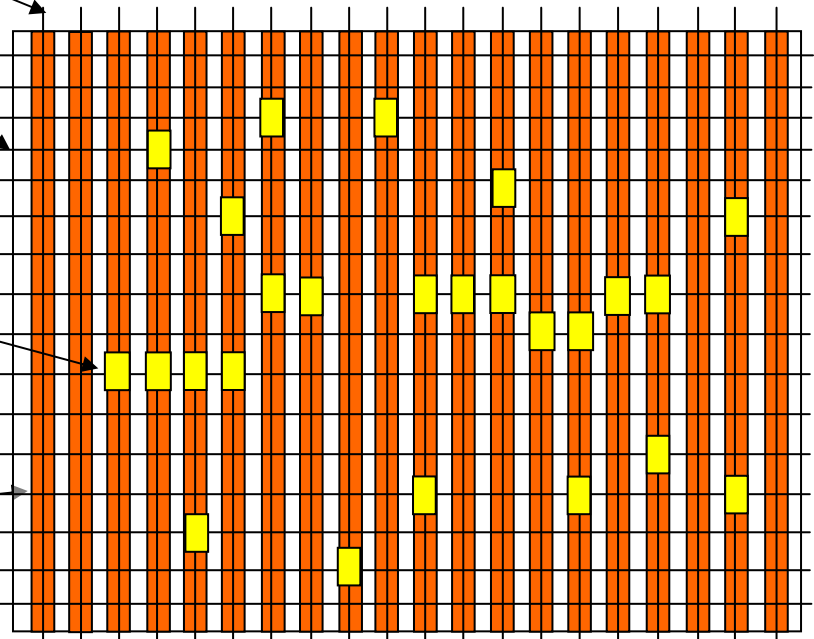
Vero Board – Step 2 add the wire Links (viewed from component side)
